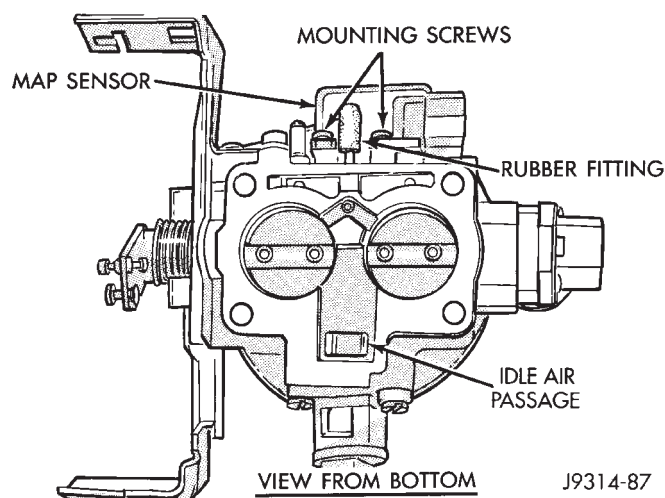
Rubber L-Shaped Fitting—MAP Sensor-to-Throttle Body
